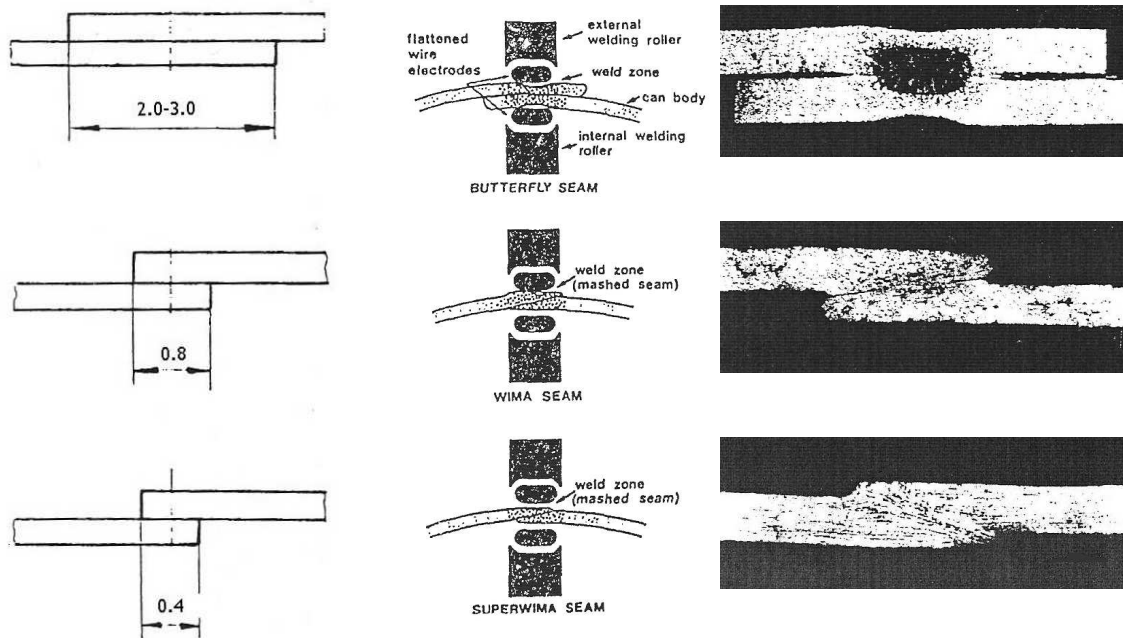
Historical developments of resistance wire welding. From top to bottom the butterfly, WIMA and super-WIMA welding principles are schematically shown. On the right-hand side associated photographs of the weld appearances are shown [6, 9 and 11].
